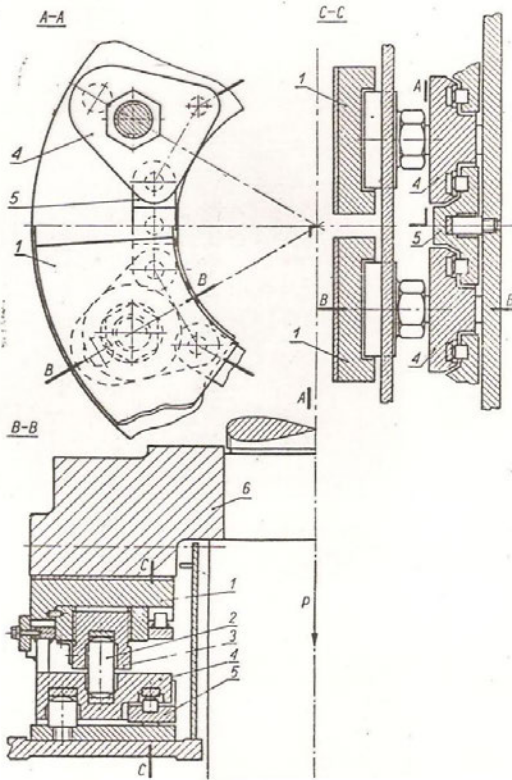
Load balancing for a multi-pad thrust bearing [10]
